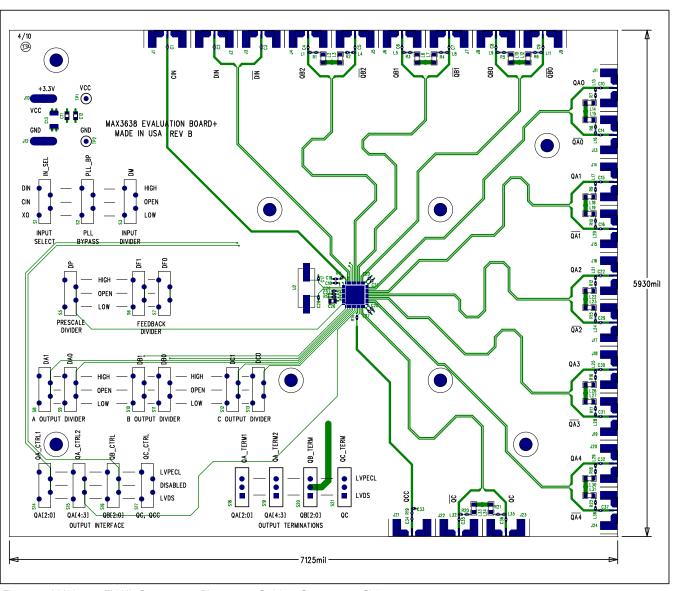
MAX3638 EV Kit Component Placement Guide—Component Side
